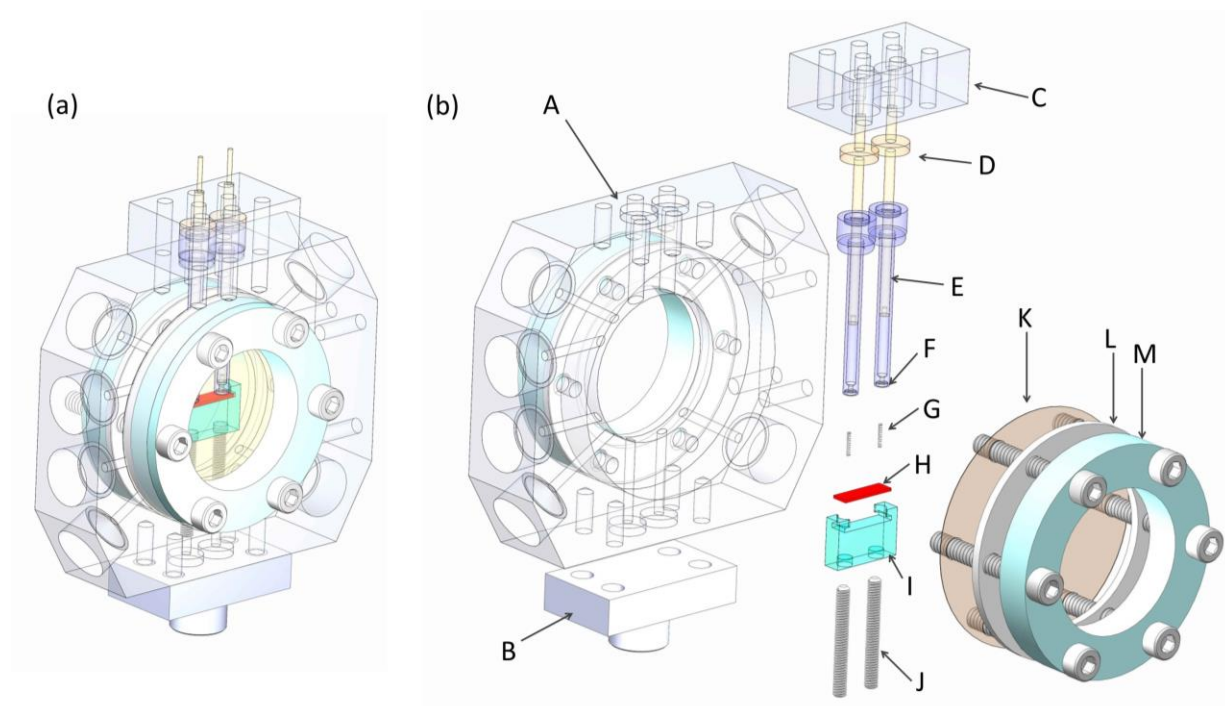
(a) Fully assembled transmission cell and (b) exploded view of cell with each part label A-M. Parts are described in the text.
